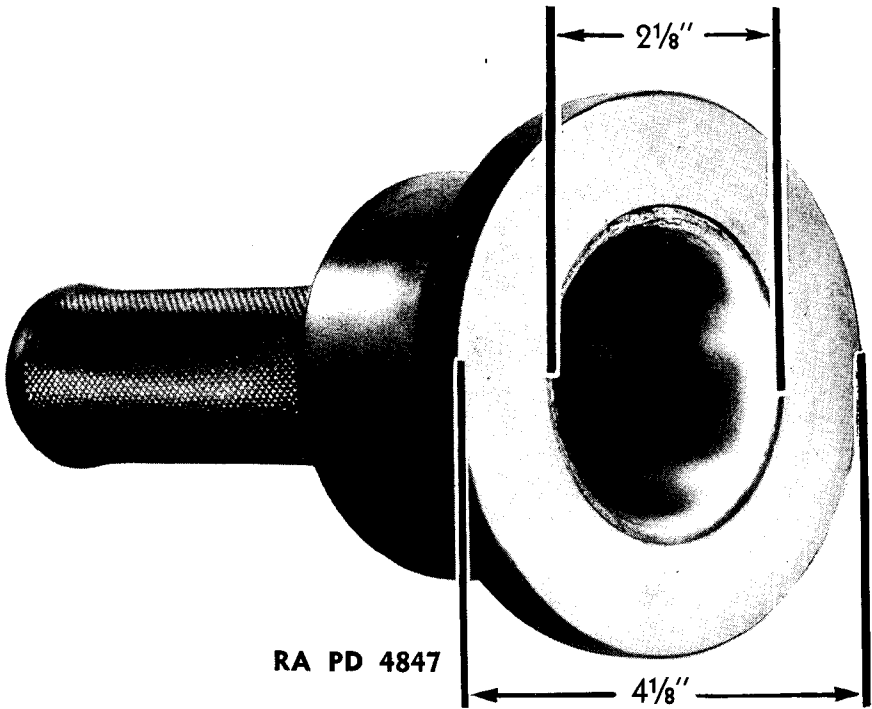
INPUT SHAFT BEARING DRIVER
